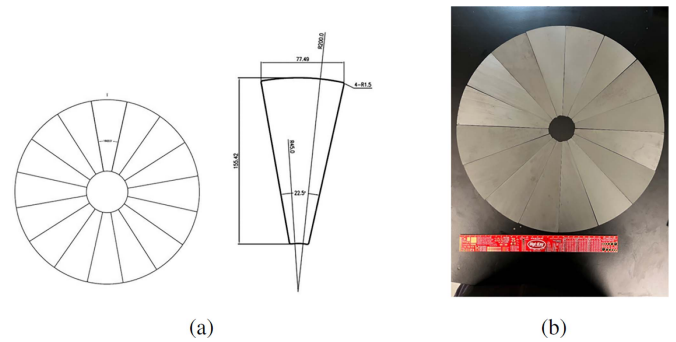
DMR51W cores. (a) Drawing of fabrication plan. (b) Fabricated ferrite cores.
